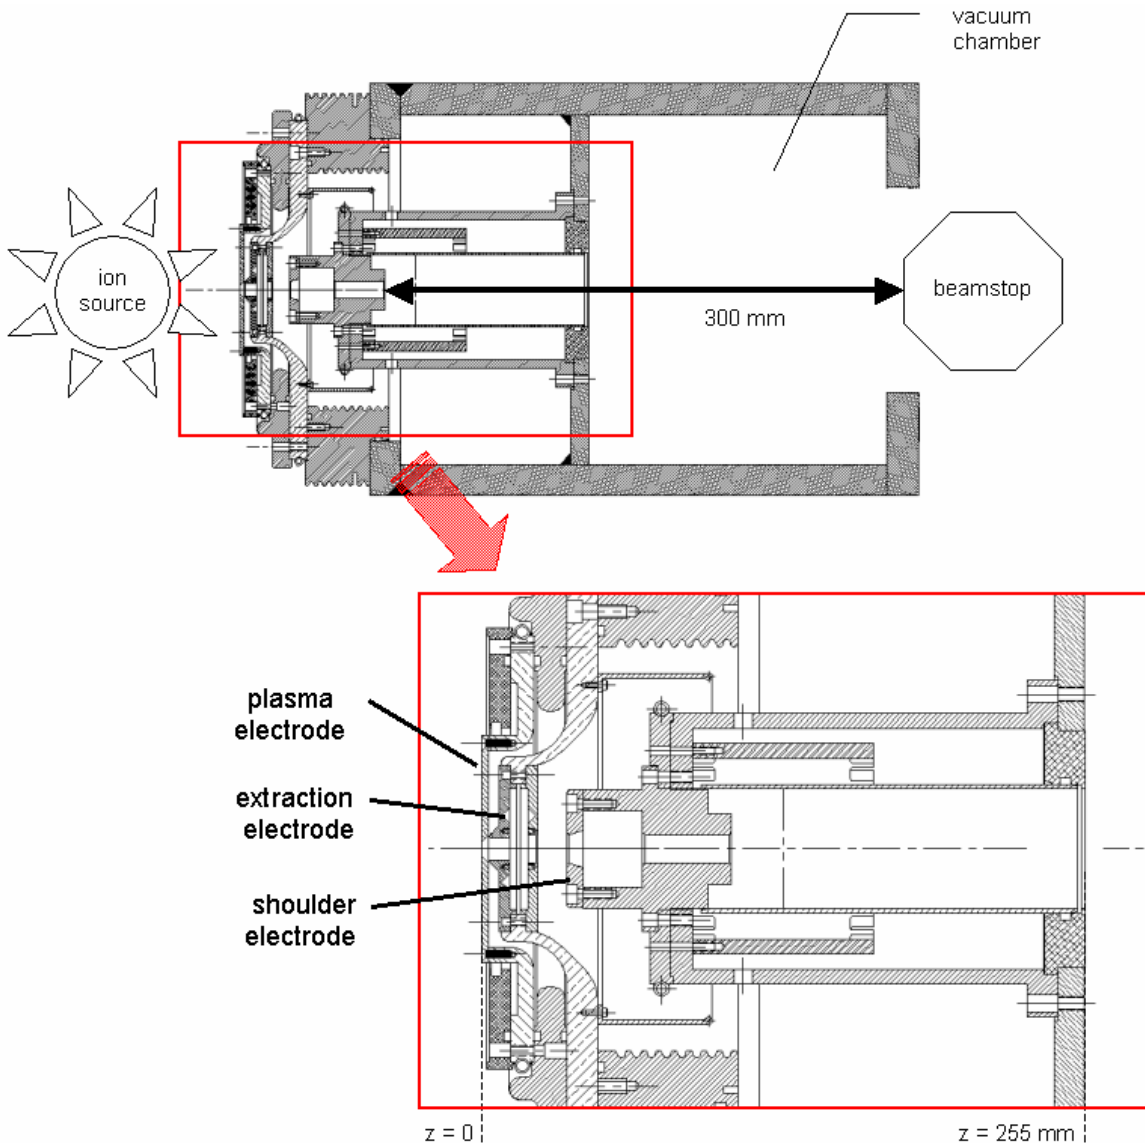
Assembly drawing of the extraction lens system, above, with a close-up of the three lenses labelled in the bottom frame. The zero position of the ions is also indicated in the bottom frame. Assembly drawing courtesy of TRIUMF.
